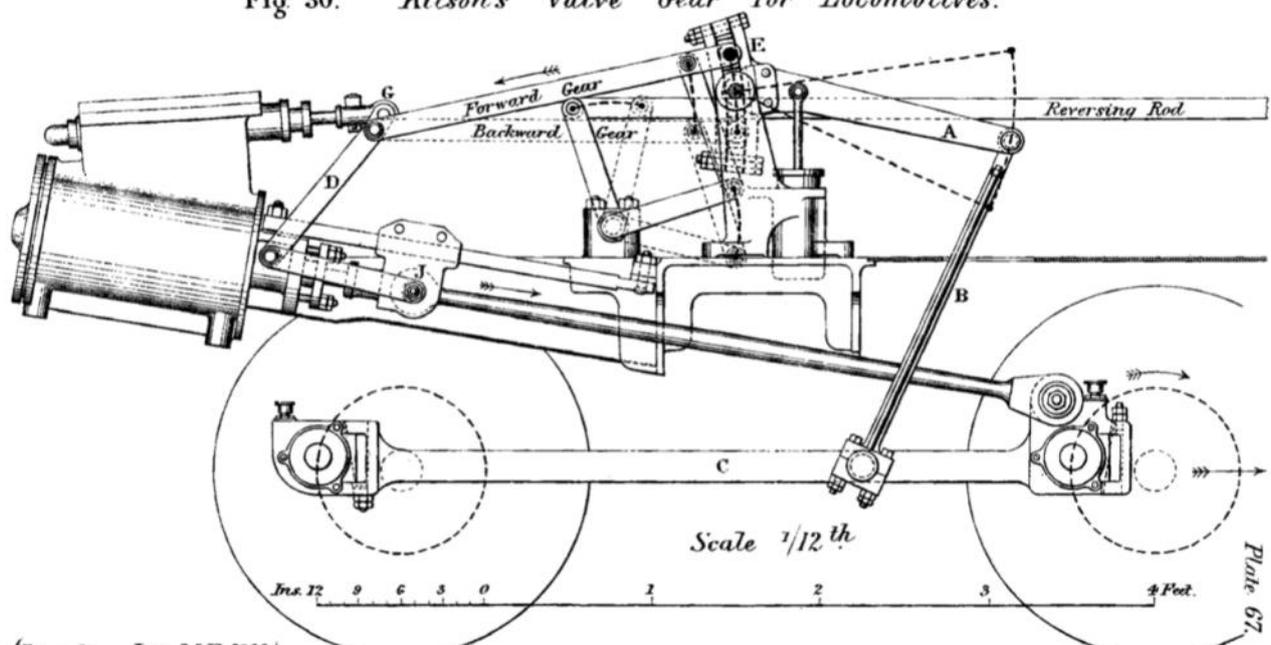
Kitson's Valve Gear for Locomotives.
